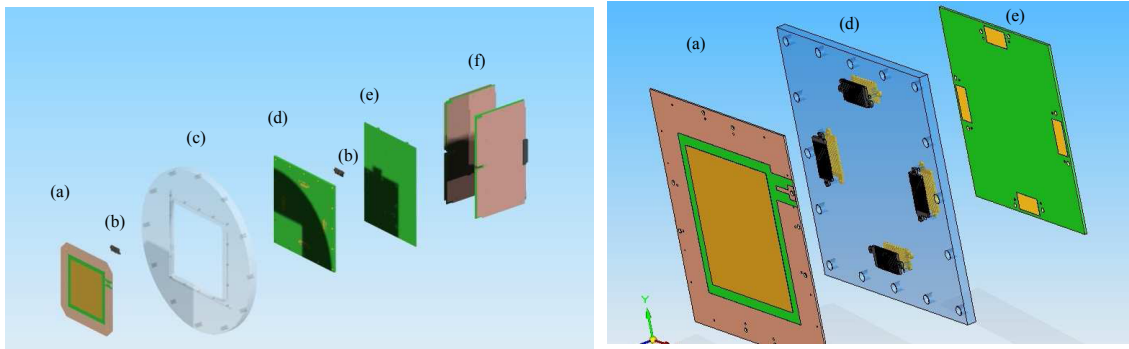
Left: Sketch of the mechanical assembly. Right: Zoom of the Readout PCB (a in the image), Leak tight PCB (d) and the Interface PCB (e).
